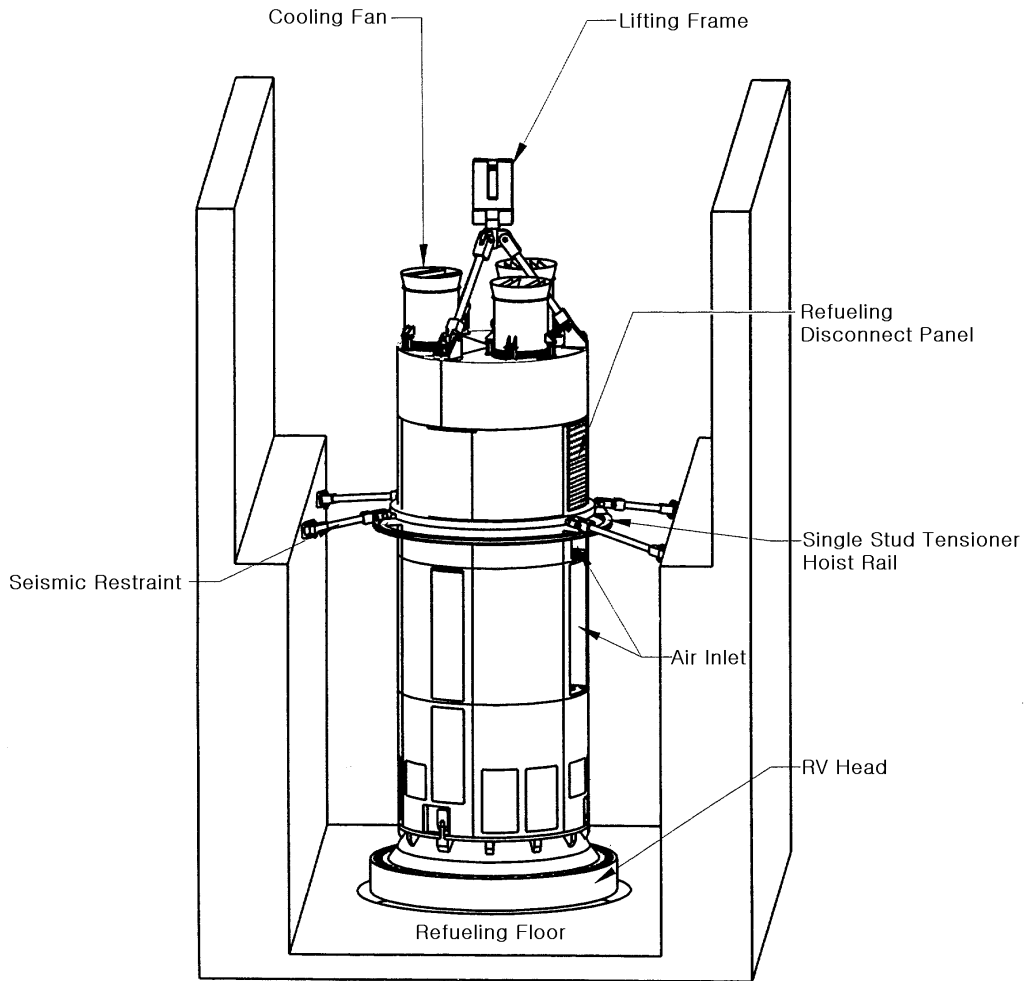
KSNP<sup>+</sup> - integrated head assembly
